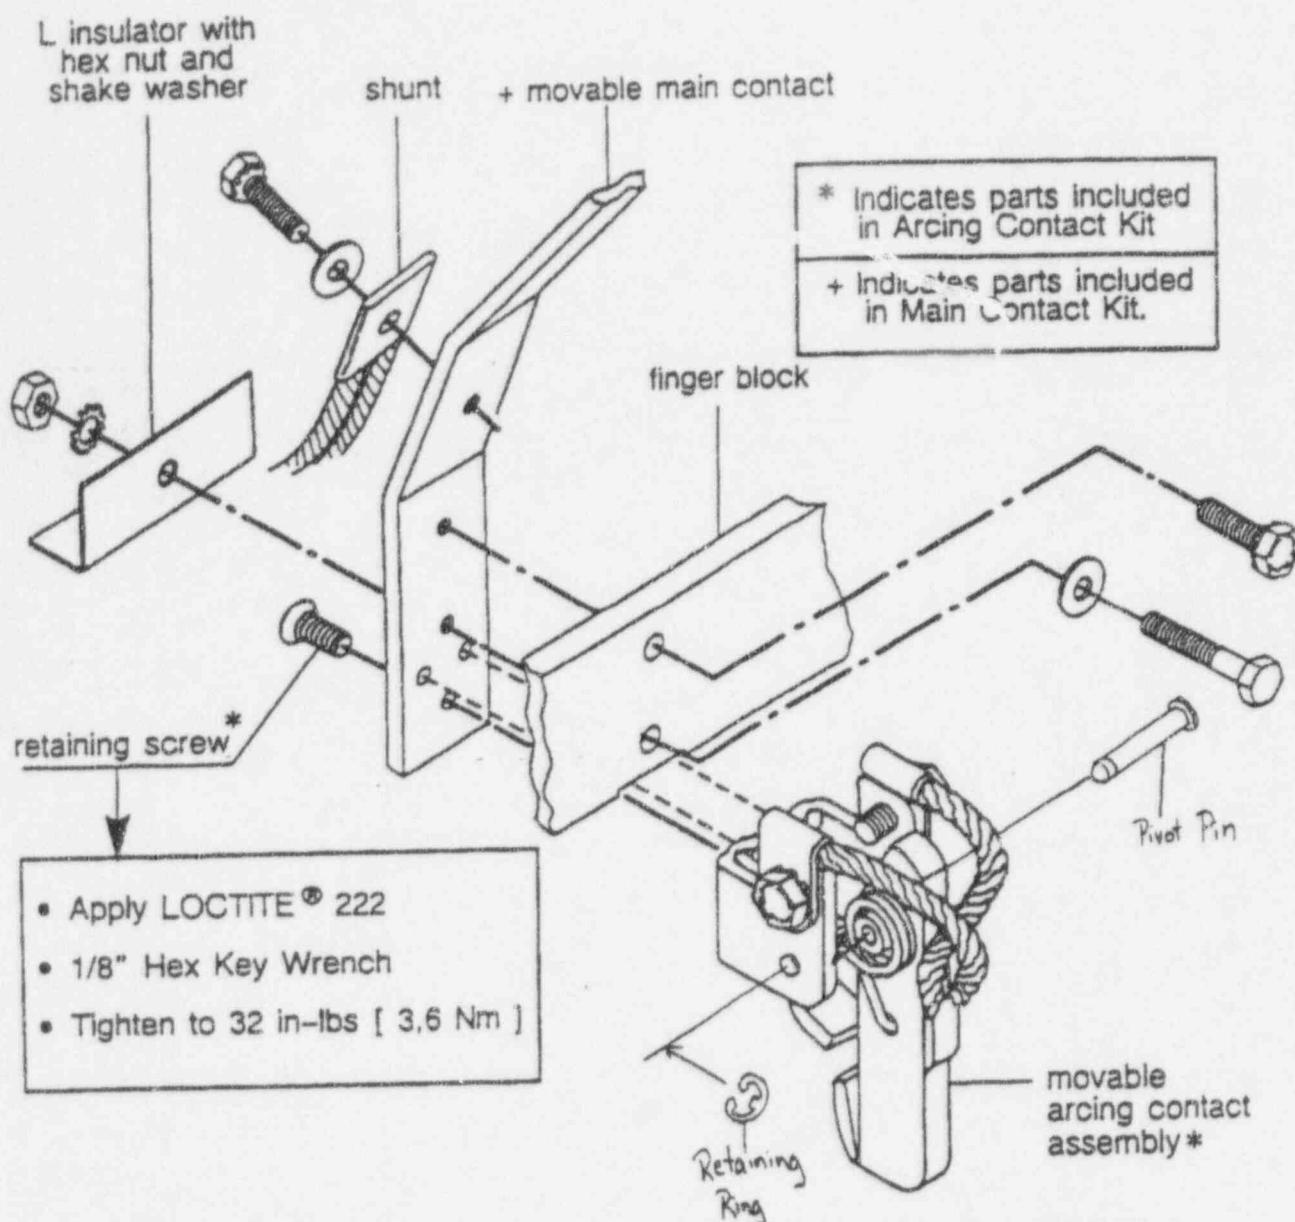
Arcing and Main Movable Contact Assembly (one pole shown) 300 & 600 A
